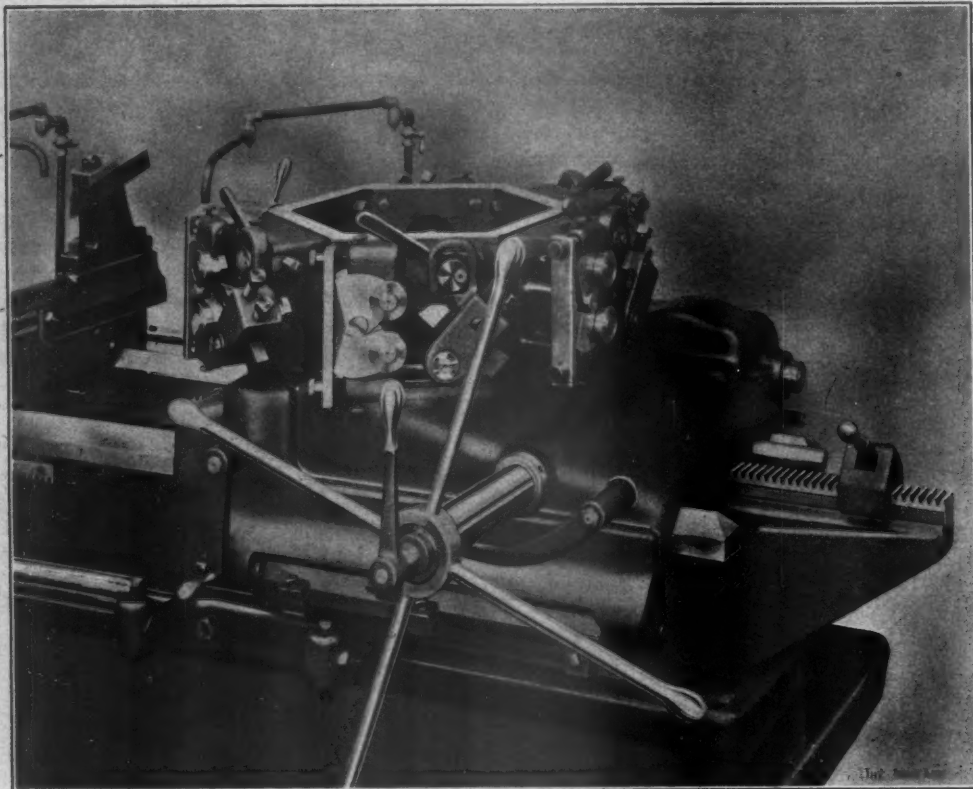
HOLLOW HEXAGON TURRET AND TOOL EQUIPMENT.
